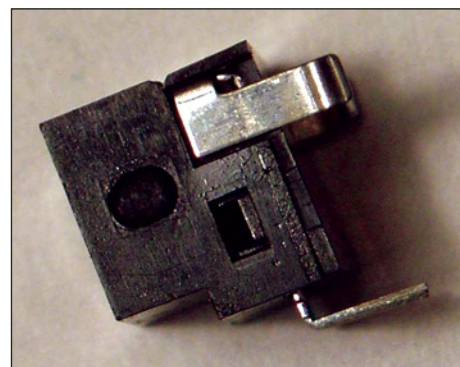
Side view of the GP2Y0D340K showing the hole where the lens mount is glued in position.
